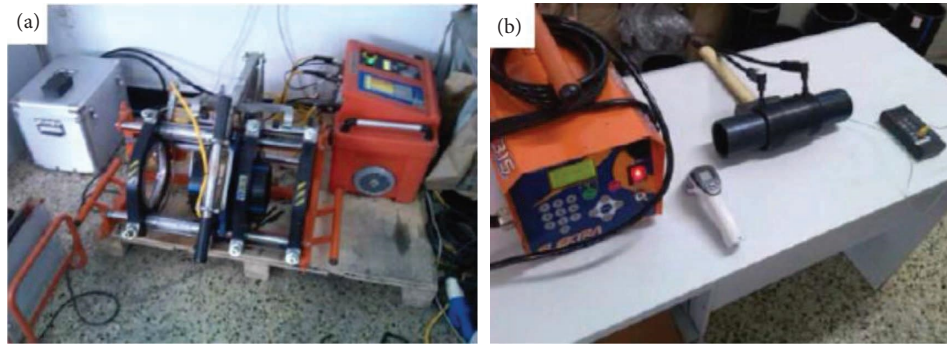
Connection methods between PE pipes: (a) thermal fusion welding and (b) electric fusion welding [31].
